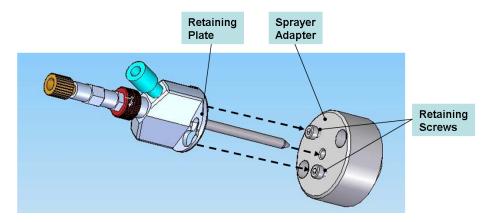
Mounting the sprayer onto the spray chamber adapter
